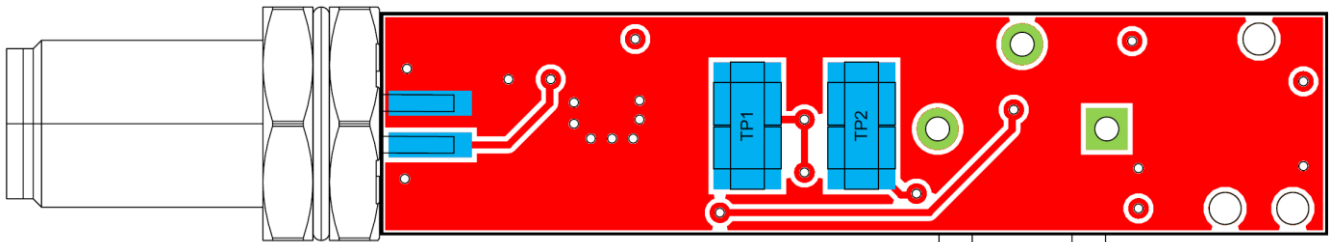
Reference Design 2: Base Board - Assembly View BOT
